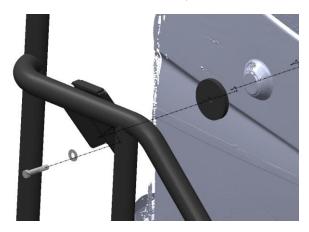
Center Mount Hardware Assembly (Outside of Door, Magnet Not Yet Removed)
